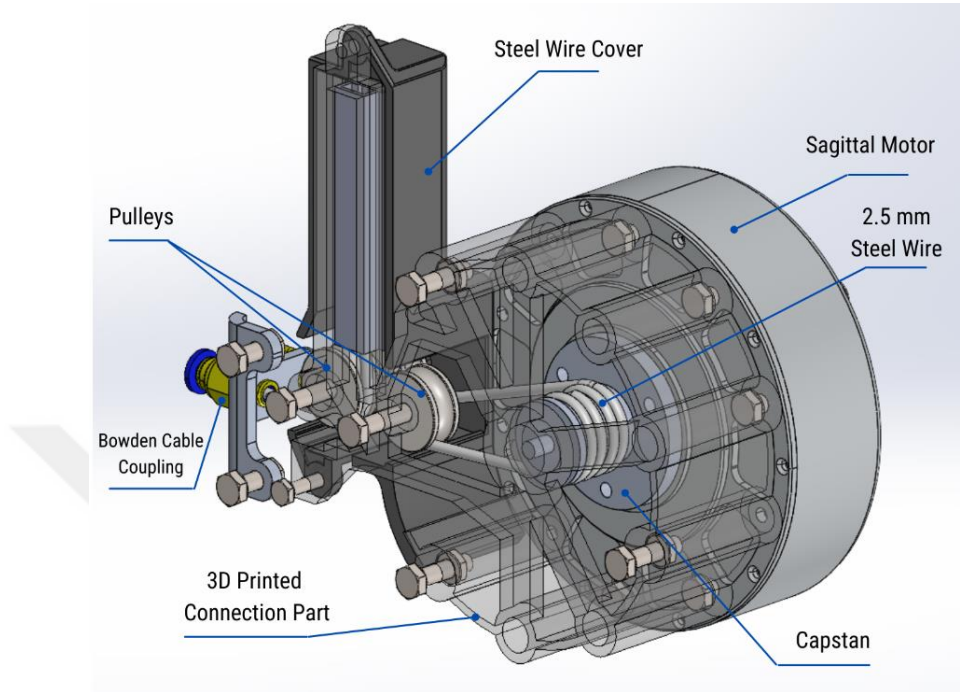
The steel wire, sagittal motor, and capstan mechanism.
